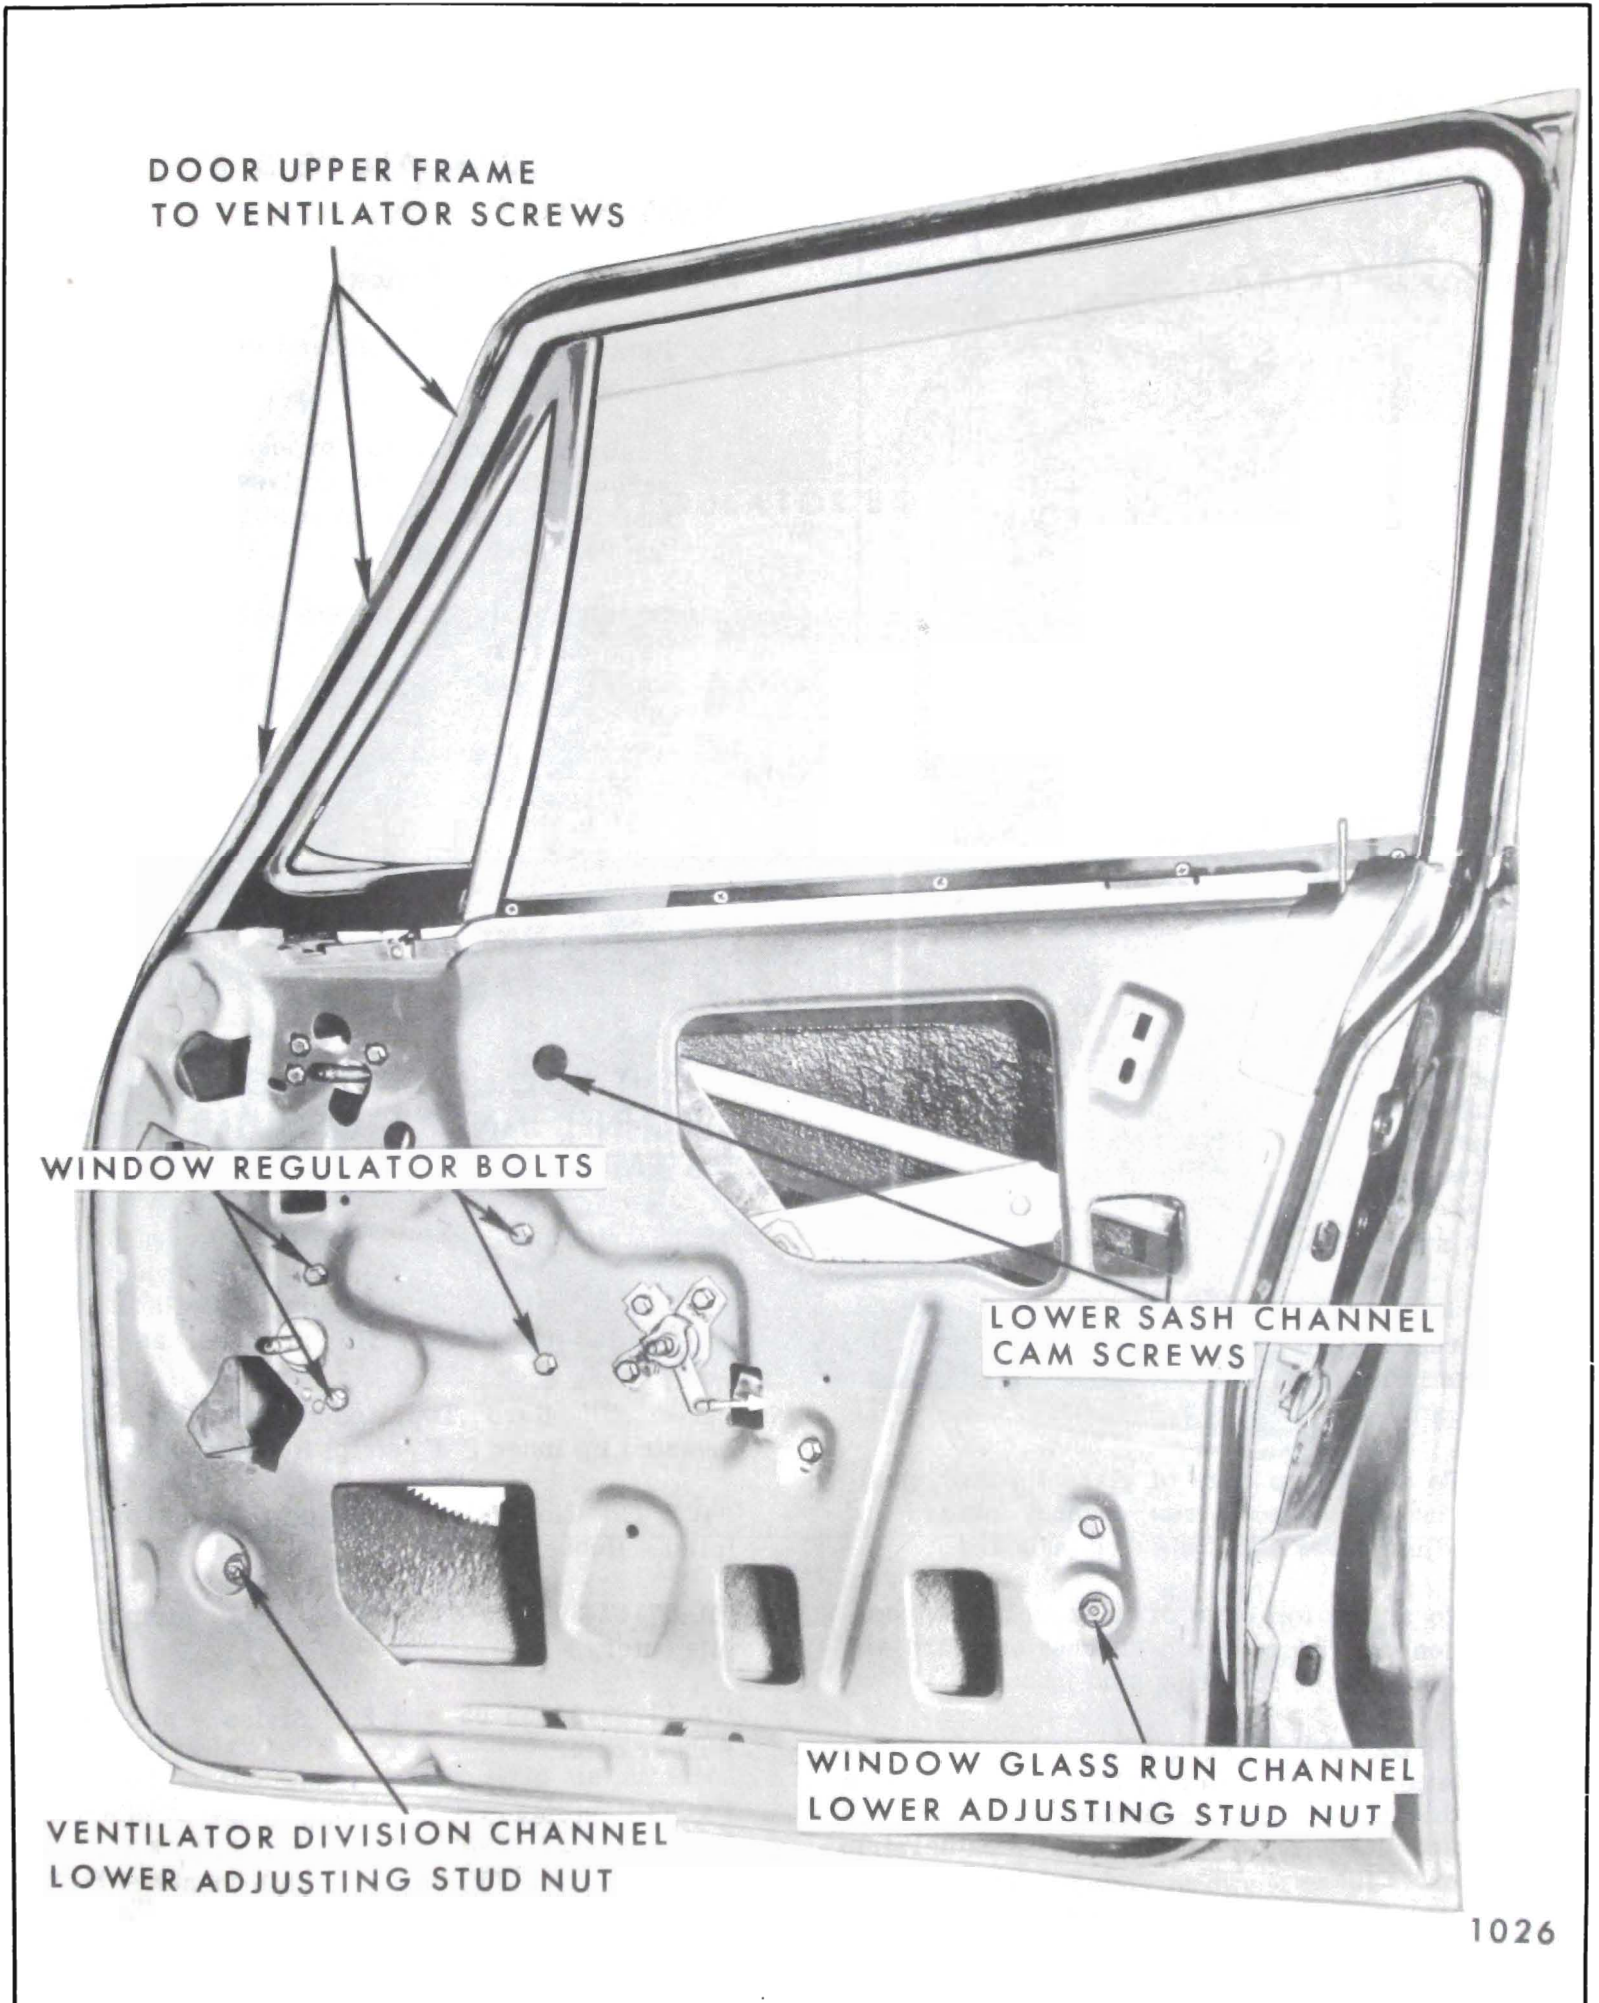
Door Ventilator and Regulator Attachment - "B & C" Closed Styles
